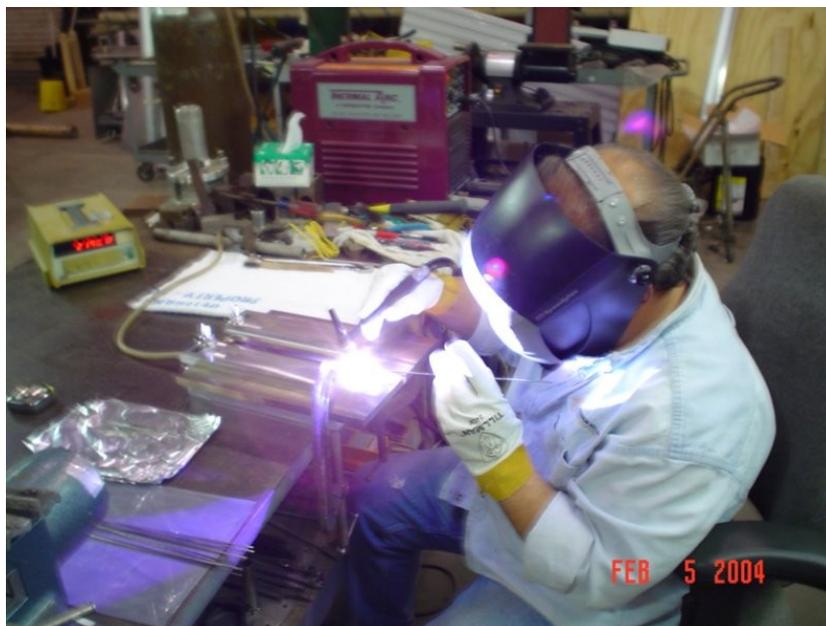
Photograph of set-up and GTA manual welding of Assembly # 1.
